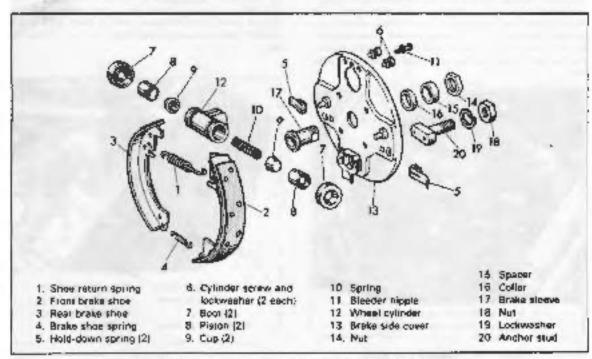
Reer Drum Brake (1972 and Earlier) - Exploded View
